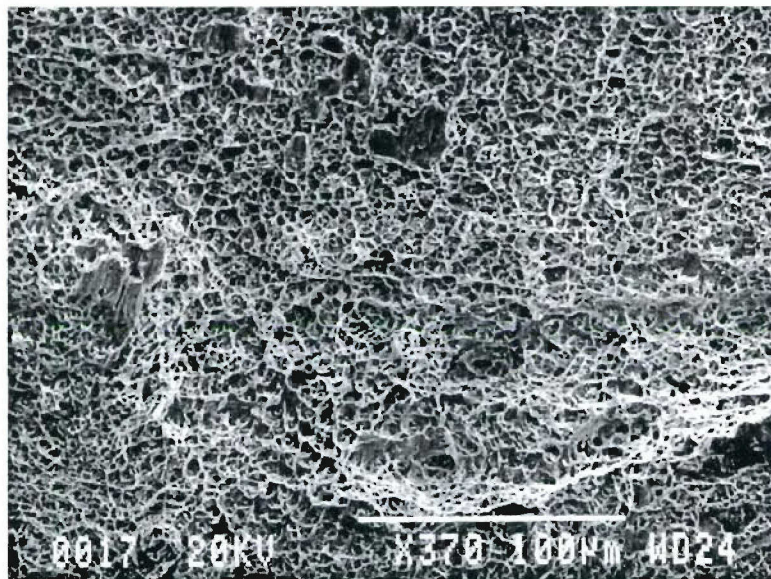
SEM micrograph of the ductile fracture surface of weld INCONEL-625 Superalloy.
